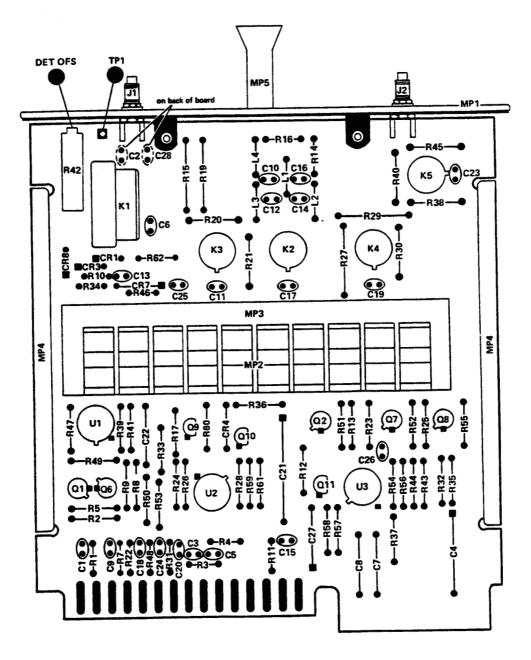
A15 RF Input Assembly Component Locations (2212A to 2412A)
